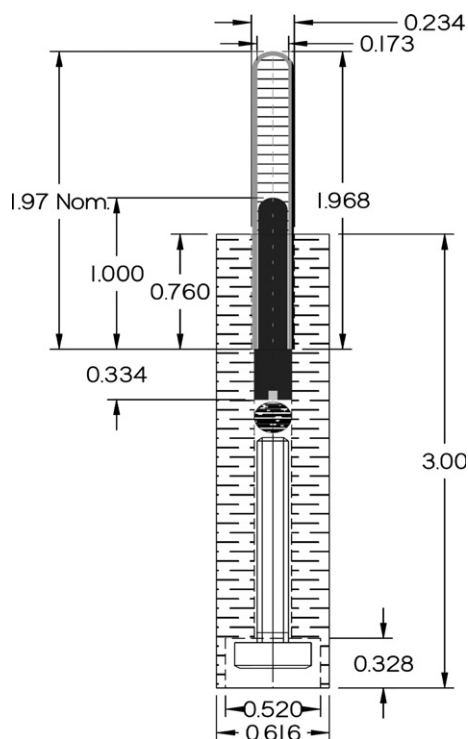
The shuttle assembly. Dimensions shown are in inches. The main body of the shuttle is Delrin the glass sample insert is Wilmad 6 mm o.d. thick wall glass tube. The first spacer screw is also Delrin but may be other materials such as PEEK. The compression screw is nylon.
